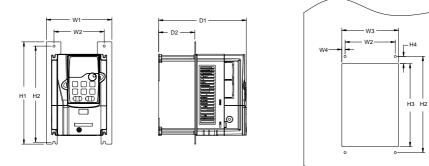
380V 1.5–75kW VFD flange installation diagram
